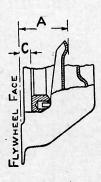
Lever setting. Dimension A—1.665. Dimension C—.285.
